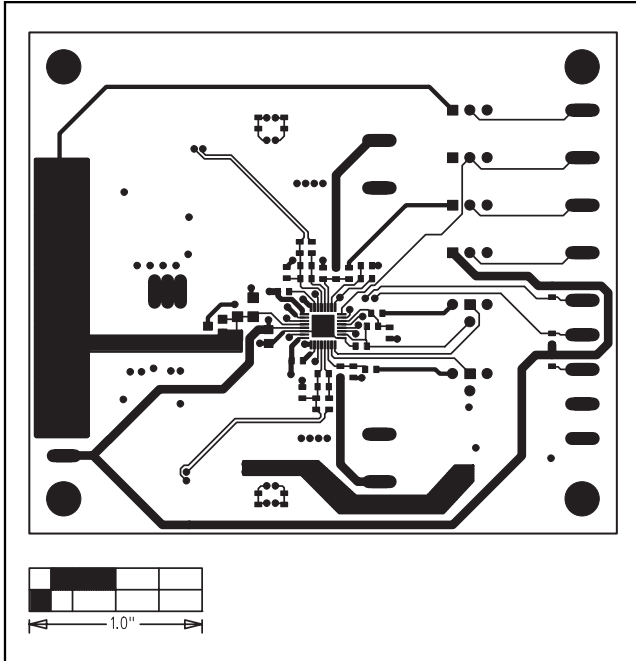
MAX8744A EV Kit PCB Layout—Solder Side
